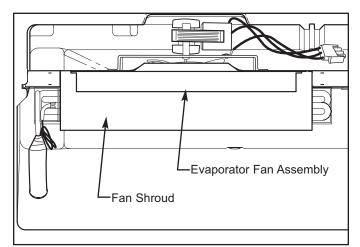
Top View of 700BCI-3 & 700BFI-3 Evaporator Fan Assembly in Sump
